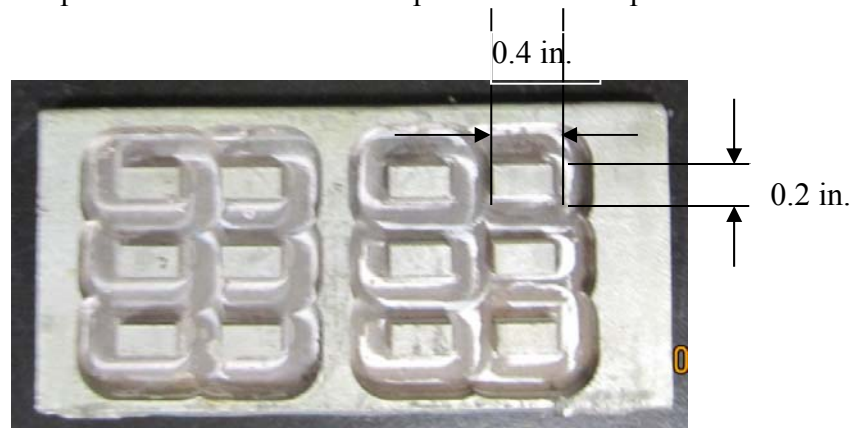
Galvanized Steel Plate after CNC Machining.
